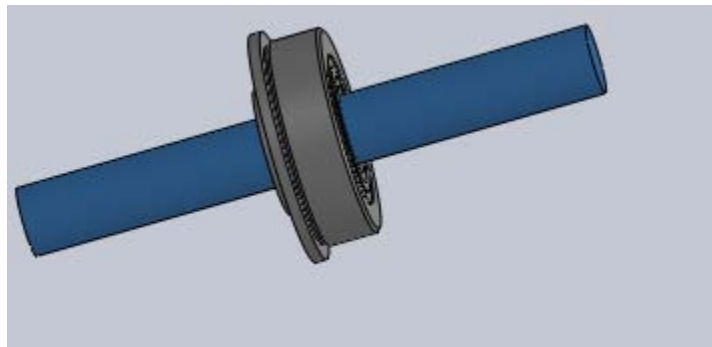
Output Shaft Press Fit to Double Seal Flanged Ball Bearing
